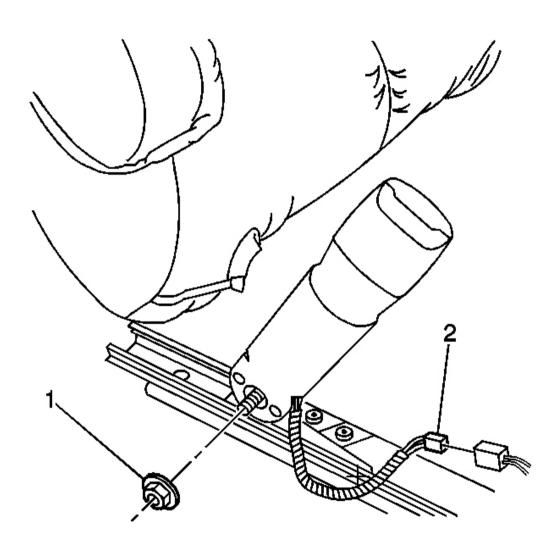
Inboard Seat Belt Buckle, Nut & Electrical Connection Courtesy of GENERAL MOTORS CORP.
